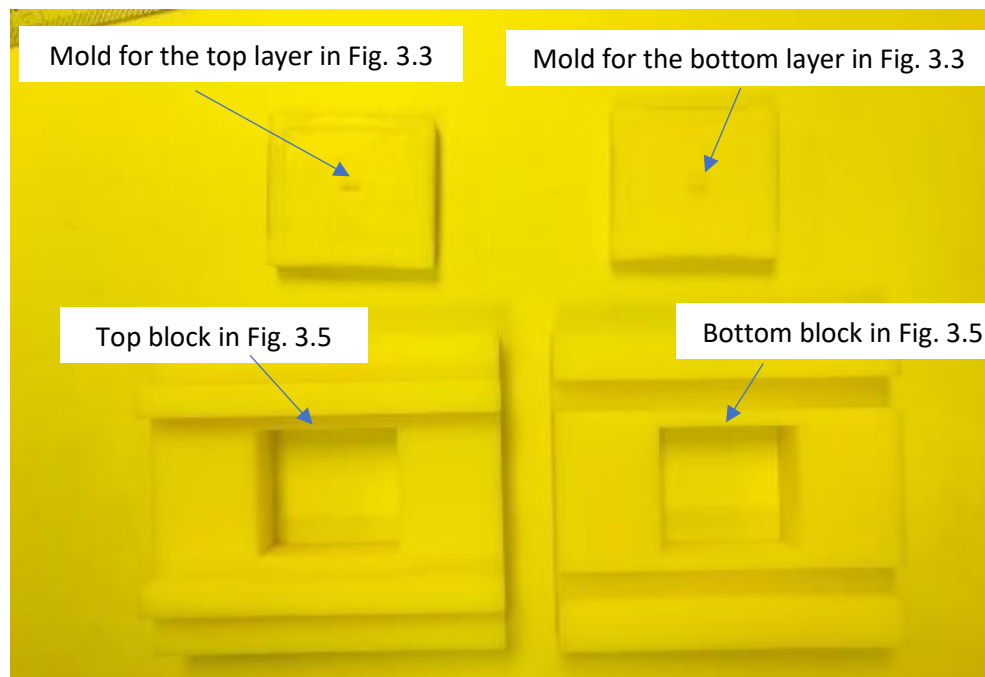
The 3D printed mold and sliding assembly for PDMS (Engineering workshop).
